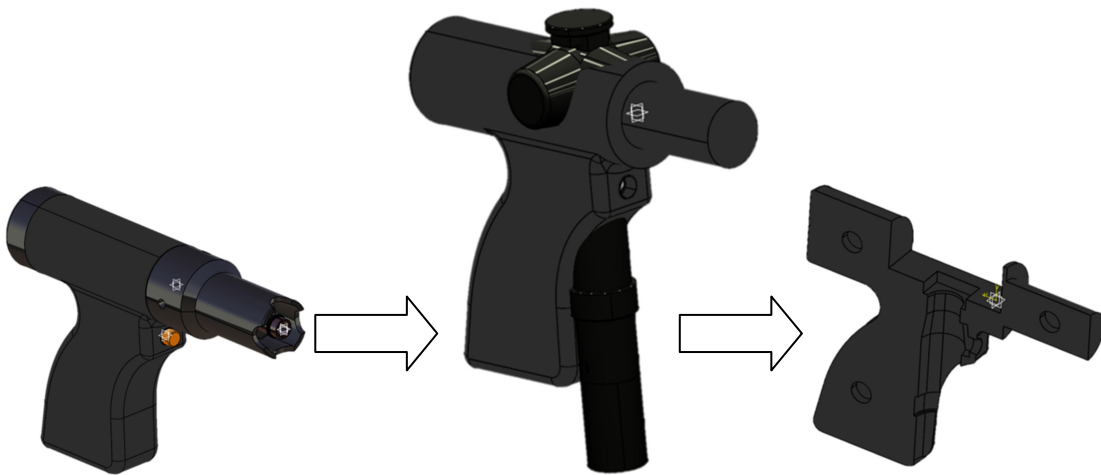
Adaptation of the CAD model of the weld gun
